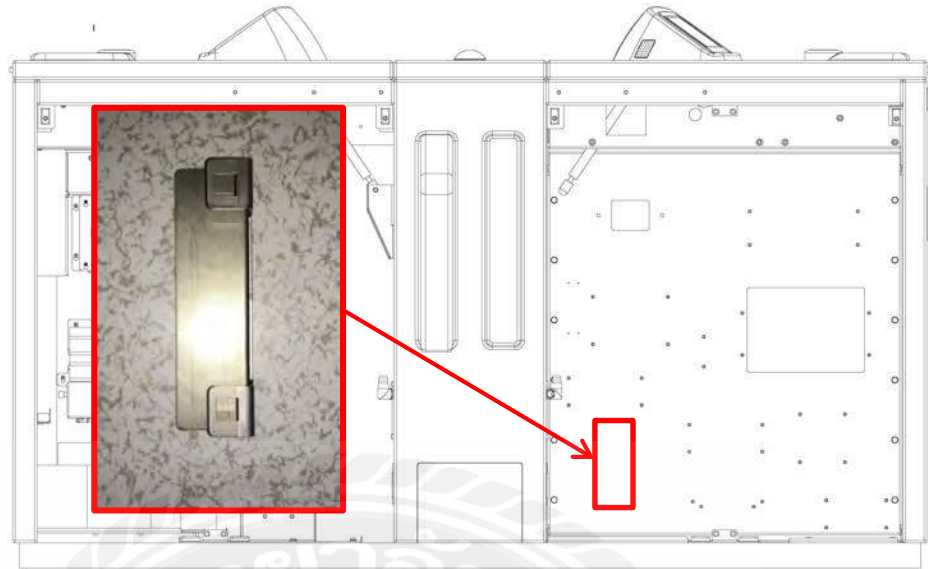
Location of the Fire Alarm PCB Bracket to be Installed in the AG
